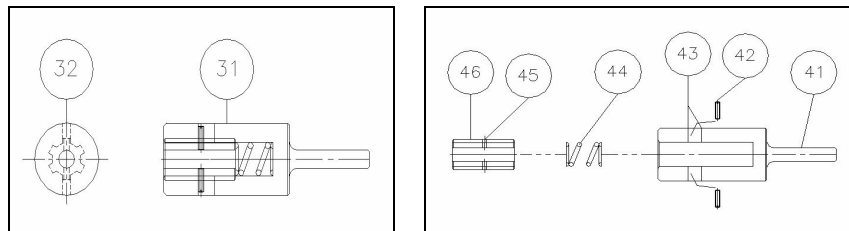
Structure and Assembly Drawing of 1 DOF Tool Holder
